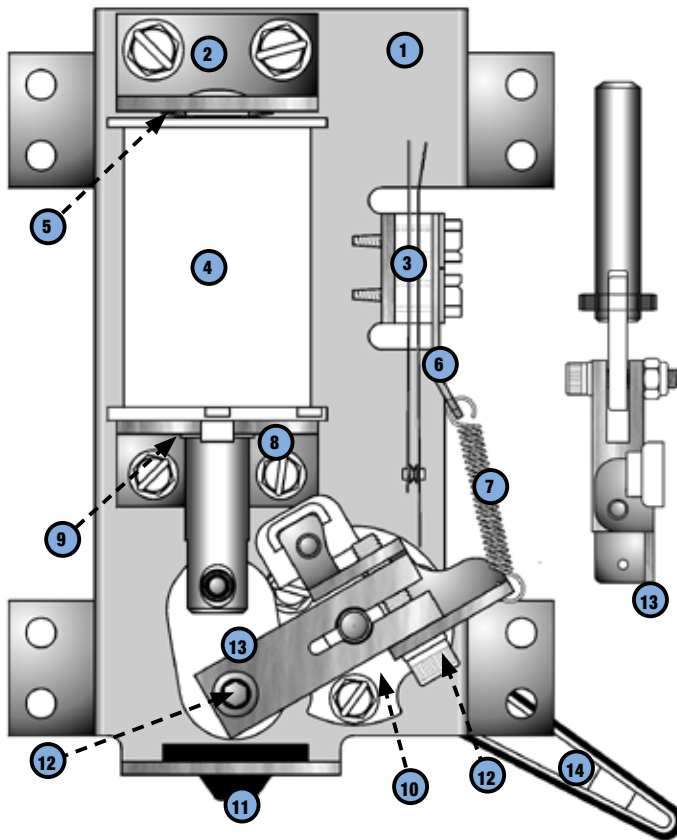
Left flipper assembly 500-6543-02-ND bottom view.
